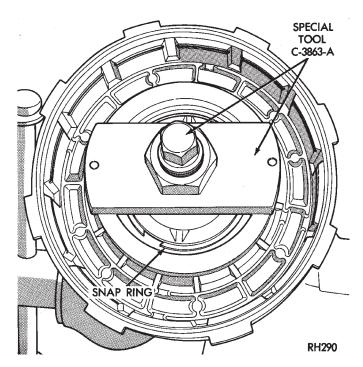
Removing Front Clutch Spring Retainer Snap Ring
